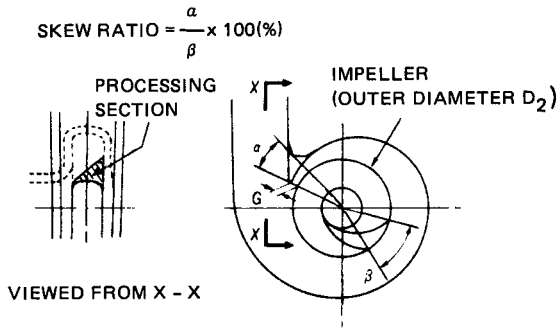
Cutwater of a spiral casing and impeller (Reference 9)
